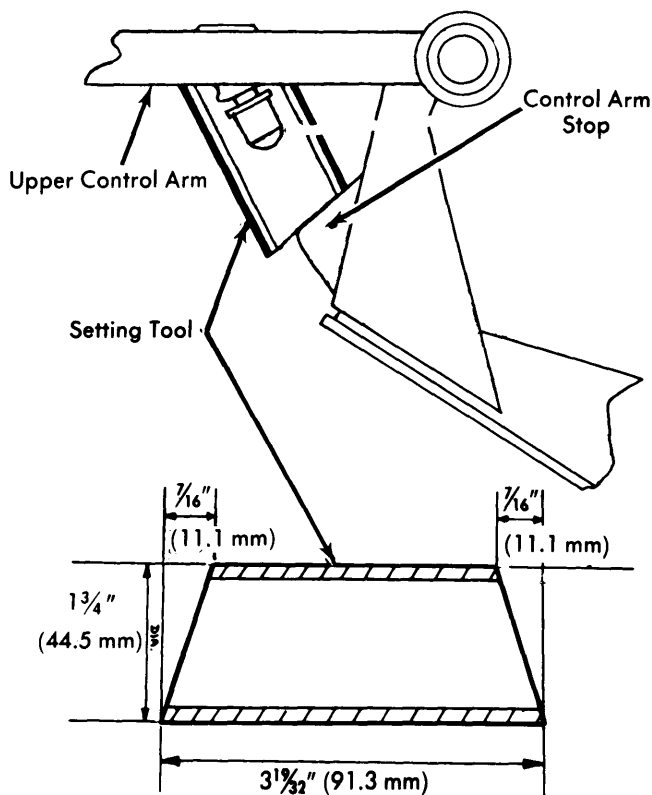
Dimensions for Fabricating the Two Necessary Setting Tools
